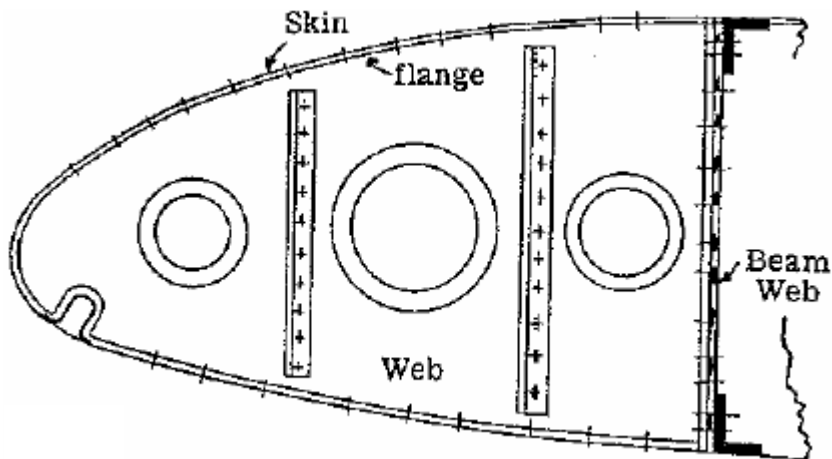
Leading edge wing rib- skin assembly by riveting [3]
